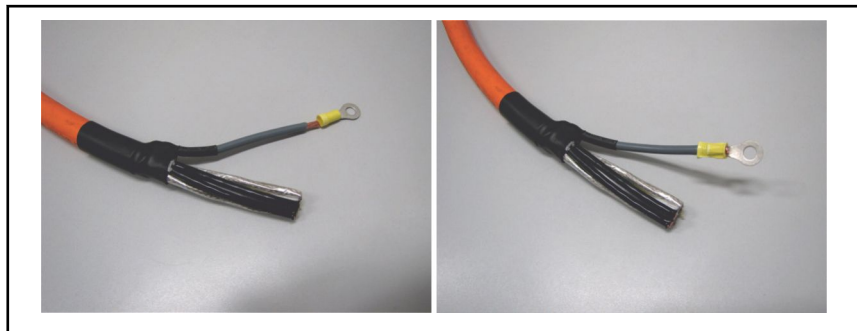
Cut shield extension in a suitable way and assemble the ring terminal
